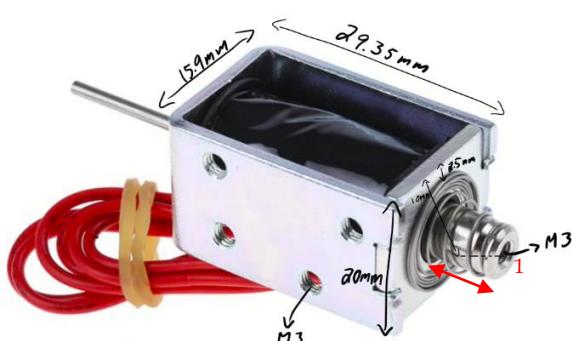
, initial linear solenoid actuator used (RS Components, n.d.)
